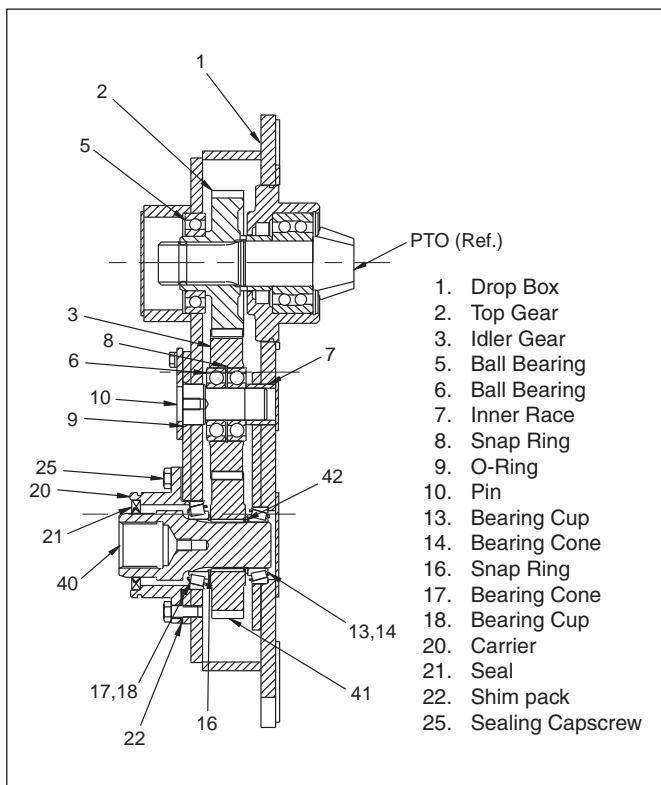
Gearbox for Caterpillar D6H/R, D7H PS, D8N, D7R & D8R
